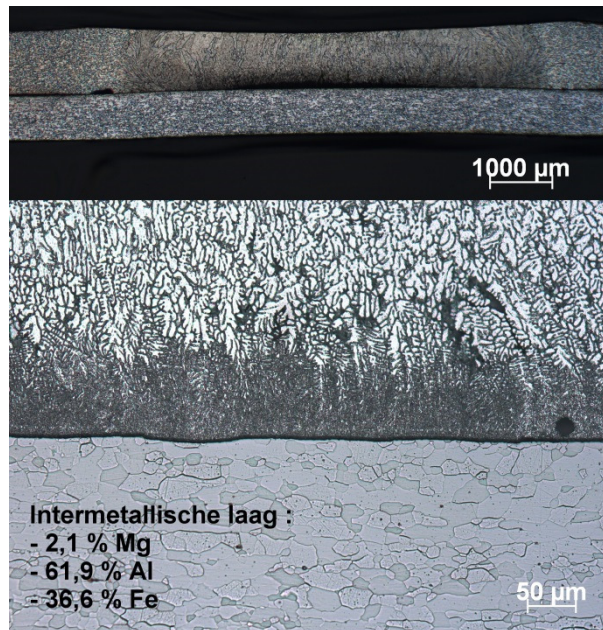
Weld of aluminium to steel using resistance welding with process tape
